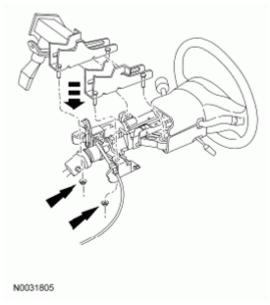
Locating Steering Column-To-Cross Car Beam Nuts Courtesy of FORD MOTOR CO.
